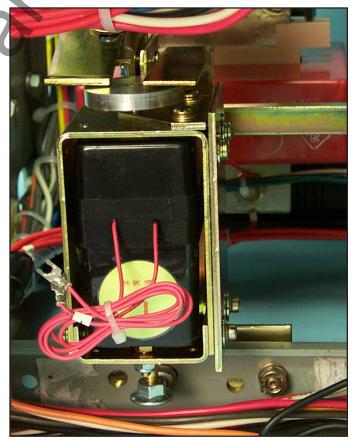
DTA Mounted to the Bottom Front Breaker Channel.
